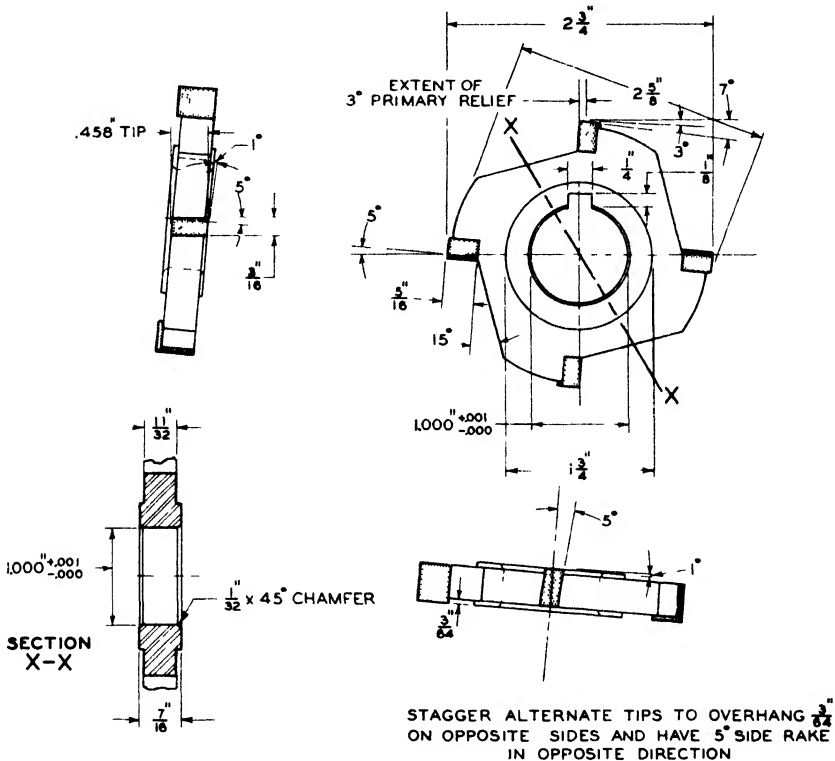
A Stagger-Tooth, Slot Milling Cutter
